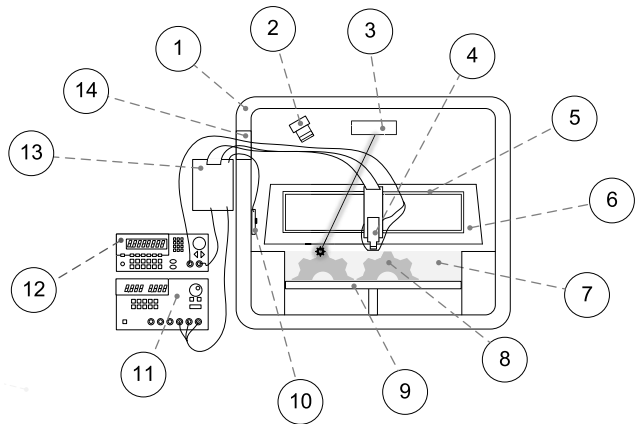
Simplified sketch of the measurement setup. 1) Build chamber, 2) layer control system, 3) diode laser, 4) MR probe with multiplexer and amplifier PCB, 5) fixture, 6) recoater, 7) powder, 8) part, 9) build platform, 10) position tracking system, 11) power supply, 12) dual-channel frequency generator, 13) DAQ module with FPGA, and 14) cable duct.
